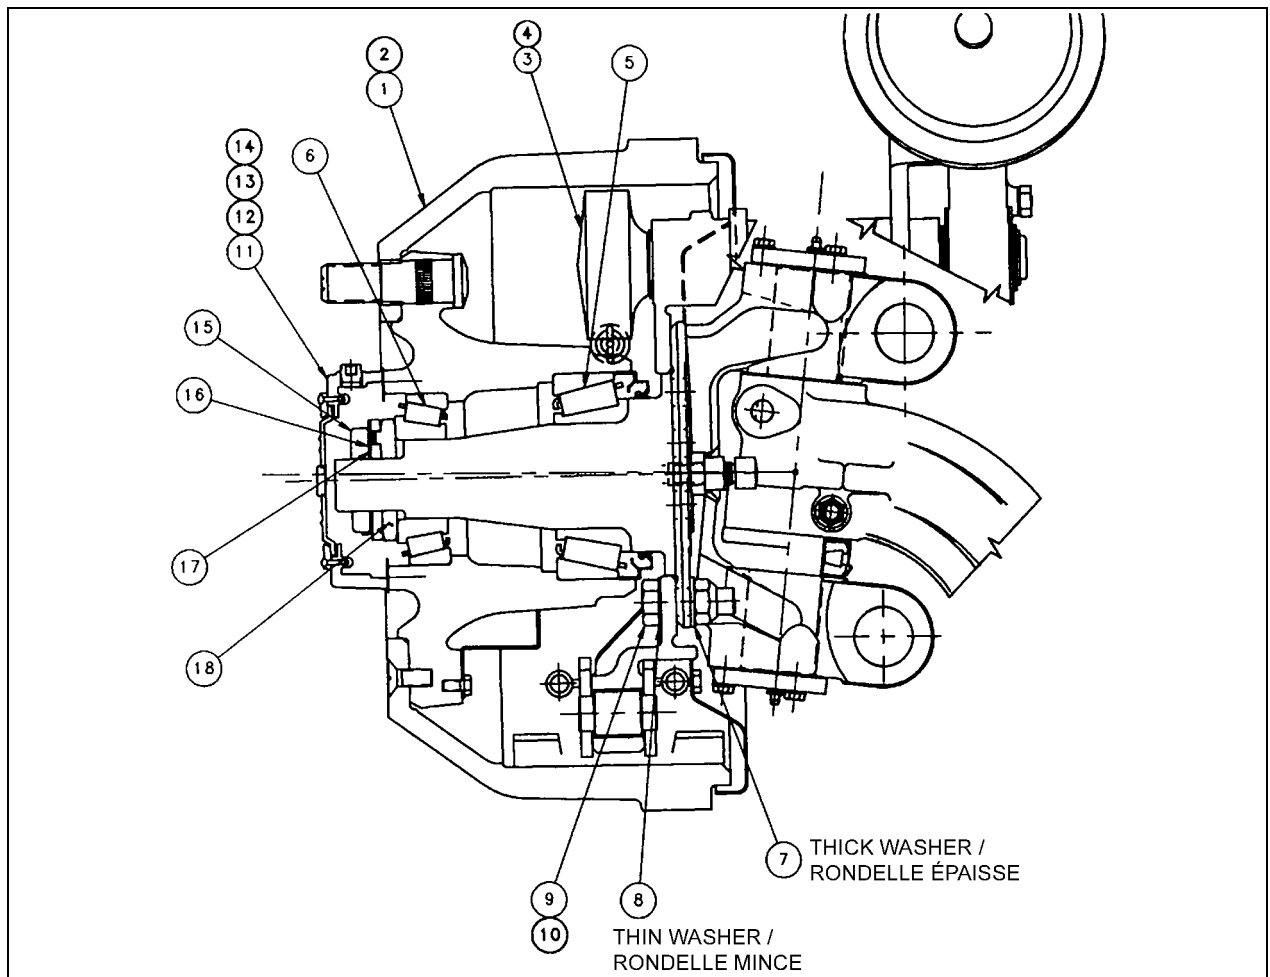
VIEW OF THE HUB AND BRAKE ASSEMBLY
